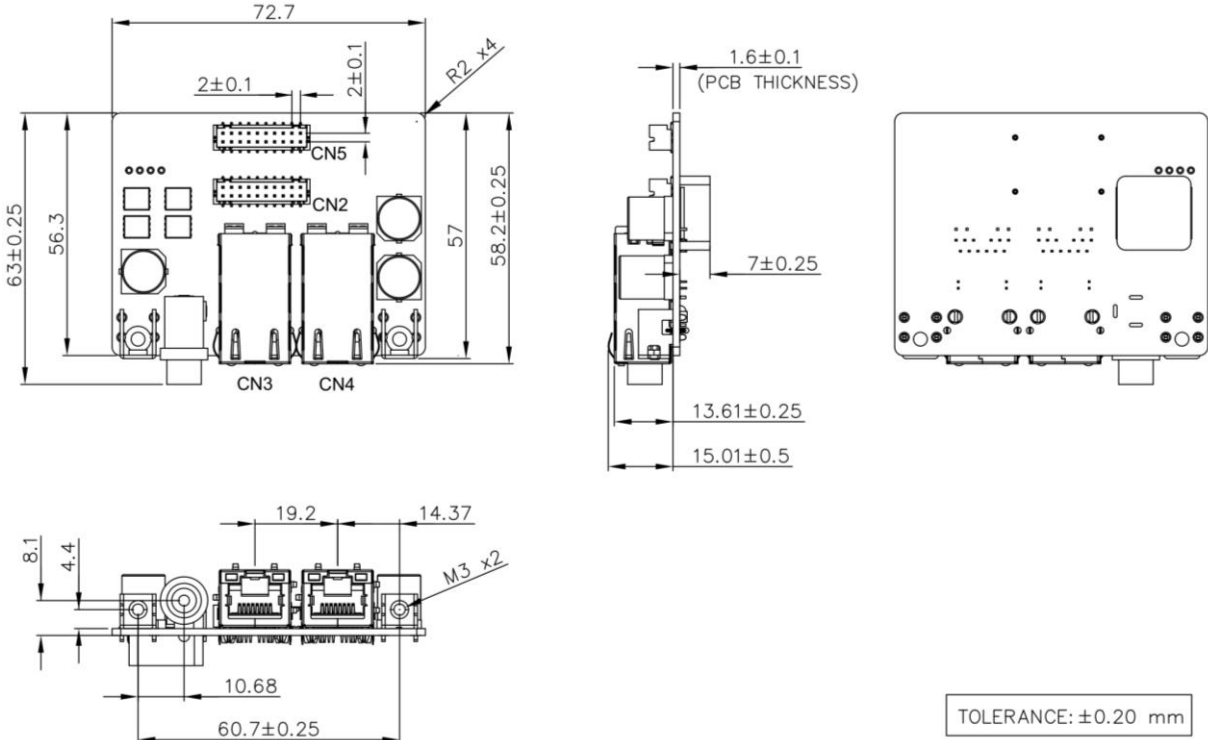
Mounting Hole Daughter Board Drawing – DC Jack (EGPL-G2P1-C3/W3)
